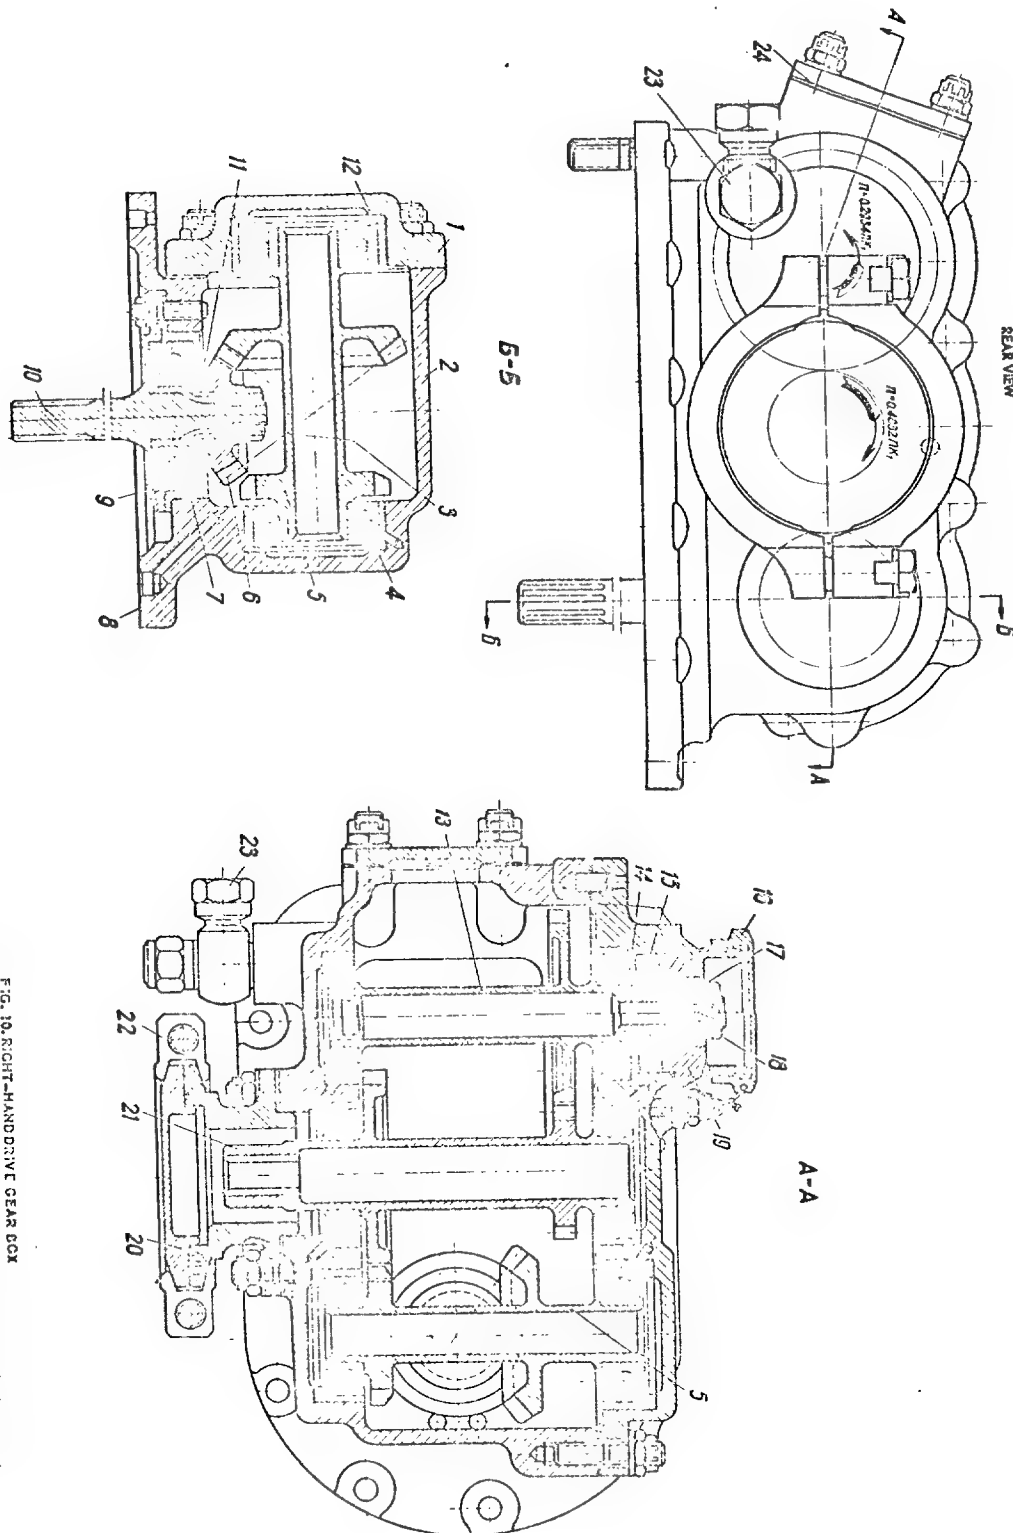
RIGHT-HAND DRIVE GEAR BOX
